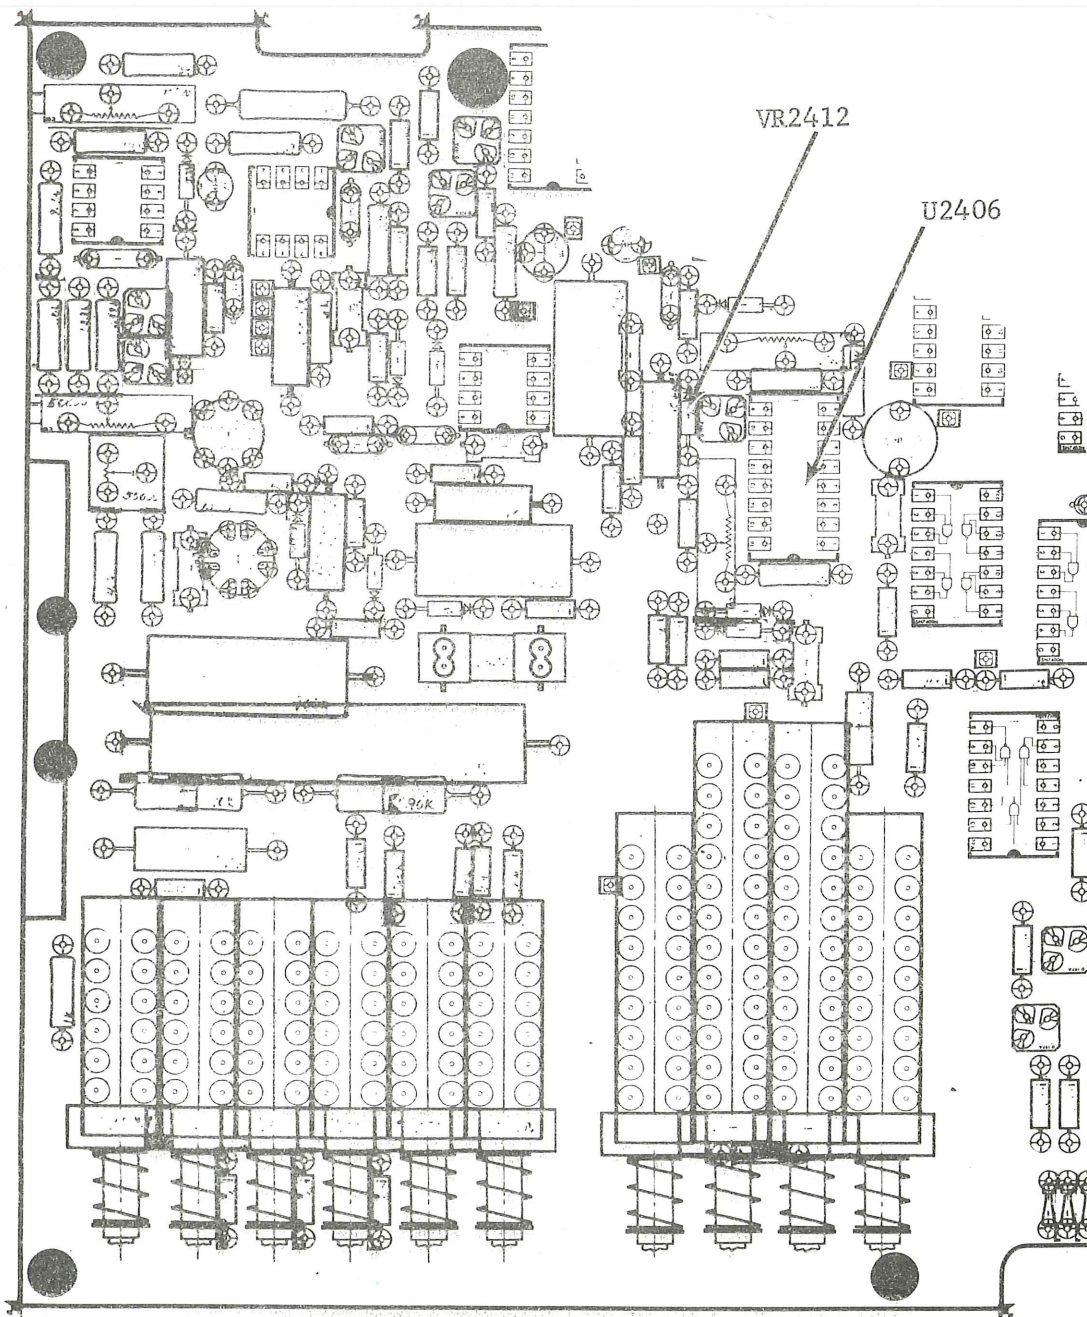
(DM43 or DM40) Partial Main circuit board (A1) showing locations of changed and removed components.
